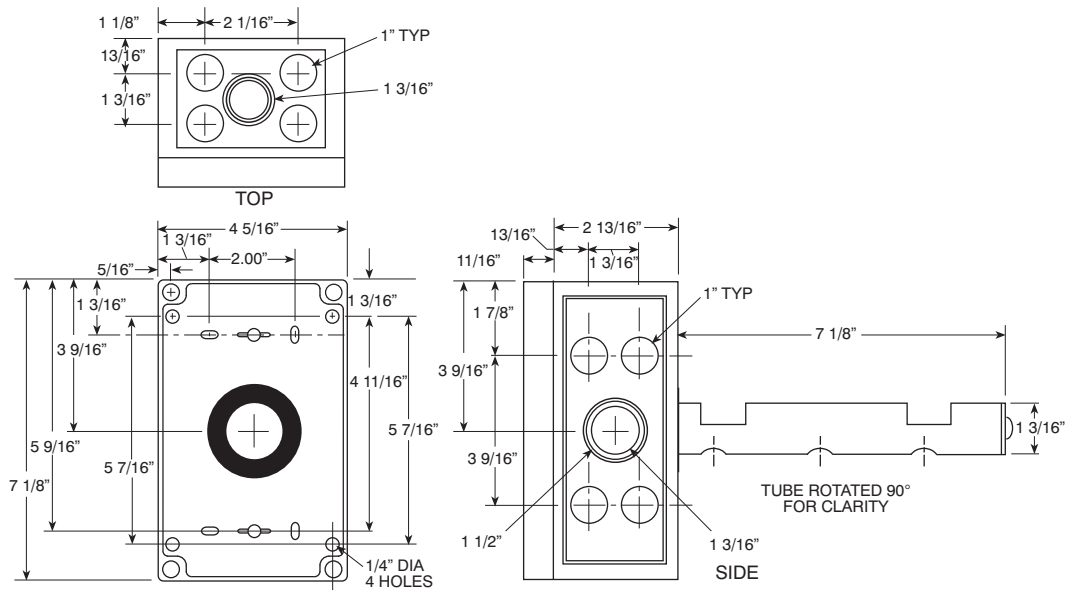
CO₂ Sensor Enclosure Dimensions
